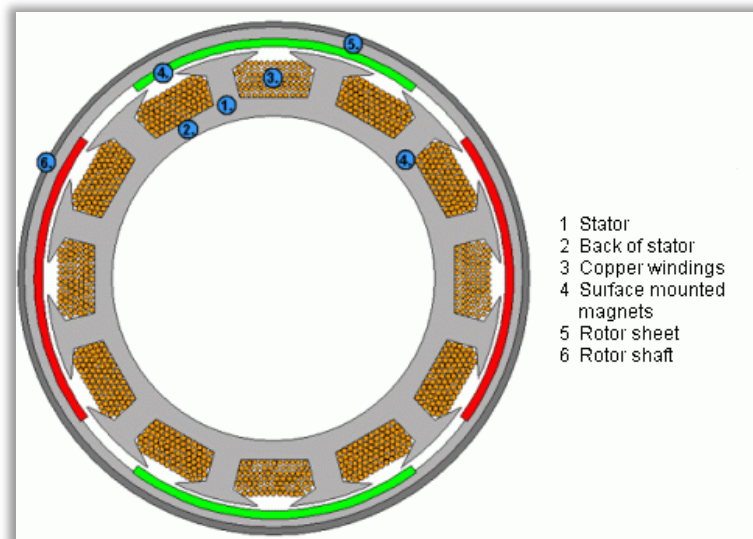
PMSM with inner rotor and surface mounted magnets (6)
